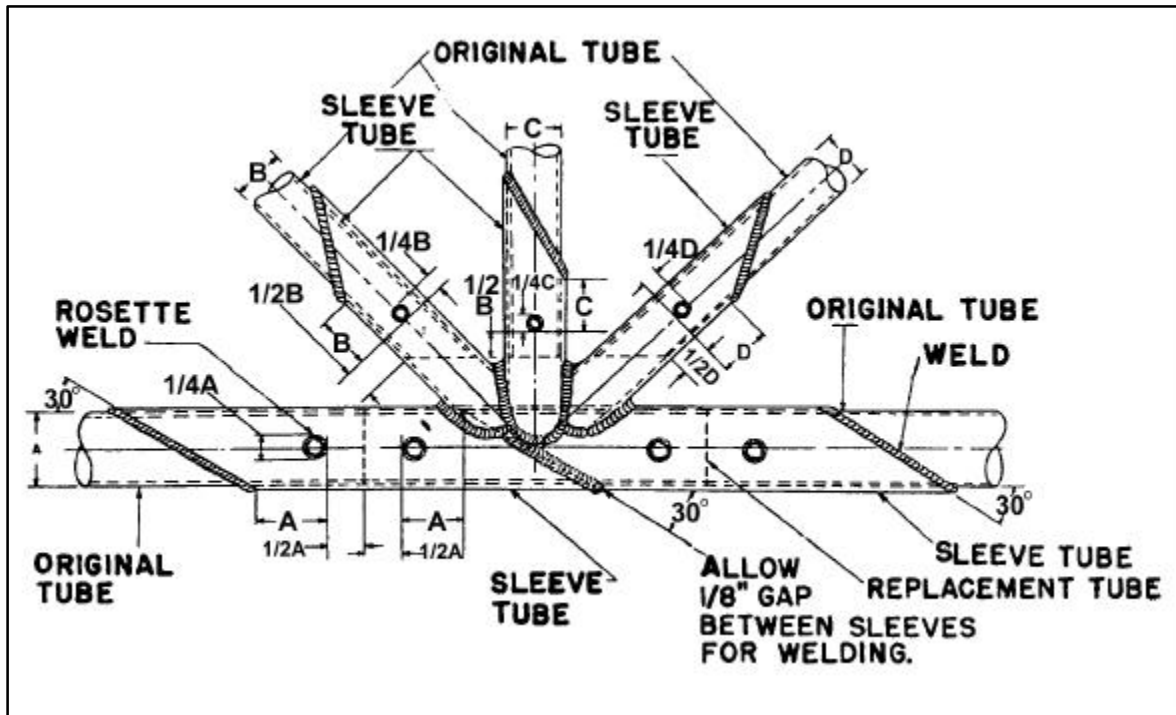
Tube replacement at a station by welded outer sleeves.
